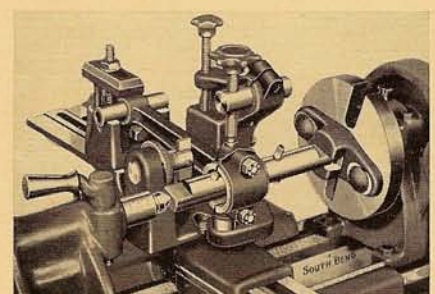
Boring, Facing and Rounding a Rebabitted Connecting Rod in the Lathe.
